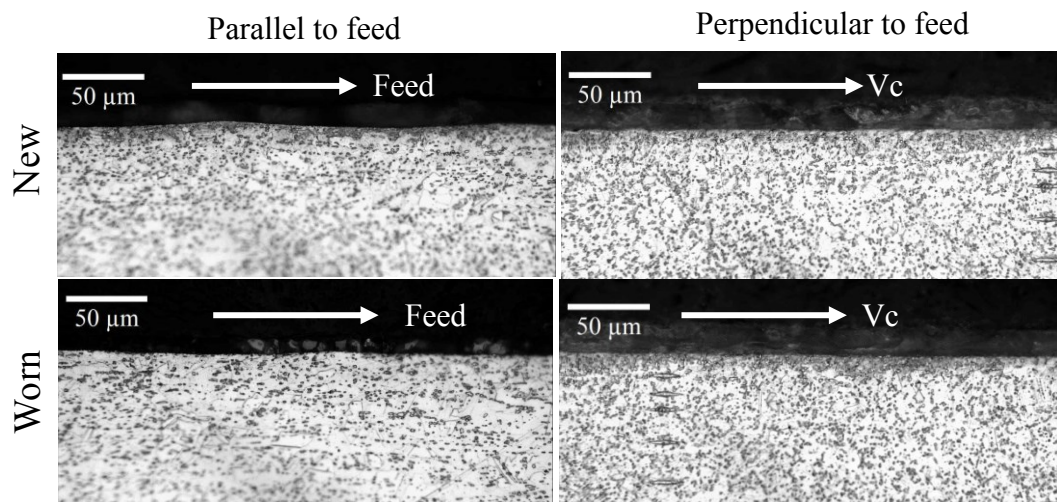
Cross sectional optical micrographs of machined workpiece sub-surface of Test 4 following machining with new and worn inserts
